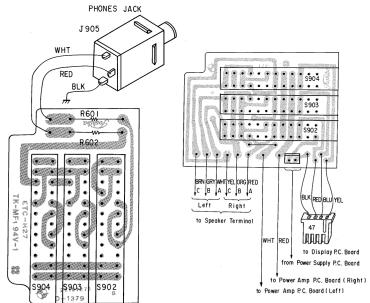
SPEAKER P.C. BOARD (ETC-H27)
